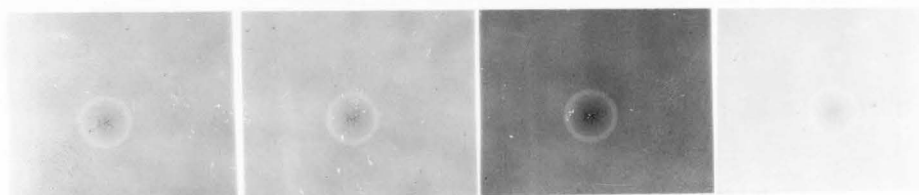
STEREOSCOPIC X-RAY VIEWS OF A SPOTWELD NUGGET CONTAINING CRACKS.
